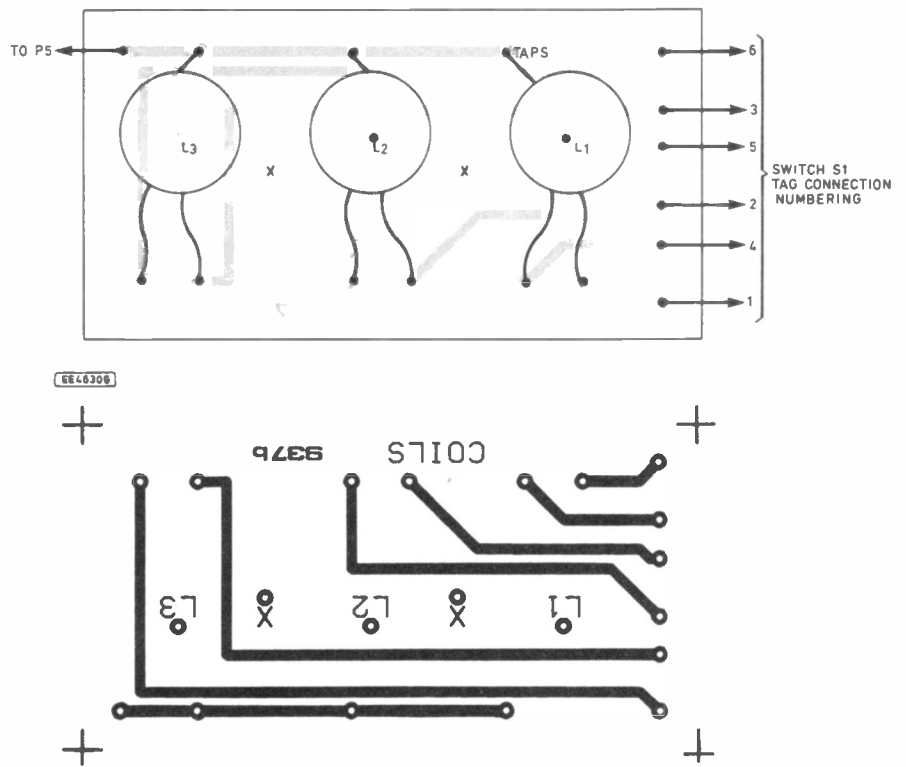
Coils mounted on the board and full size underside copper foil master pattern.
